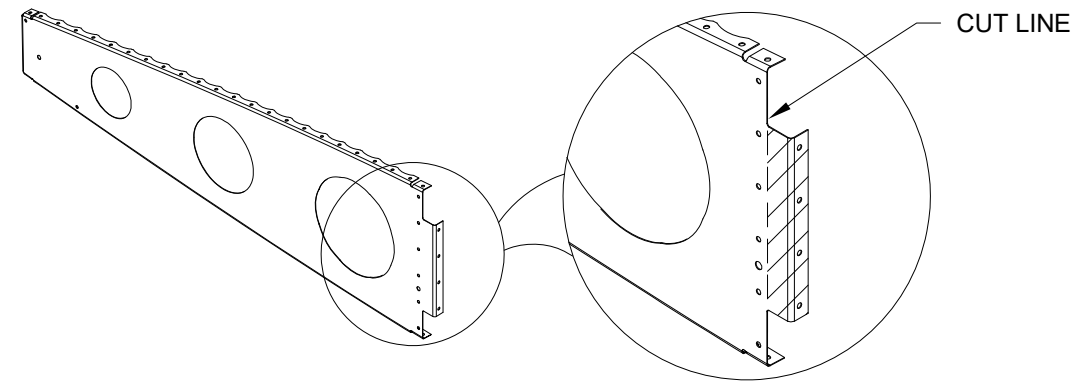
W-1210-1 MAIN RIB FWD FLANGE TRIM (LEFT SHOWN)
